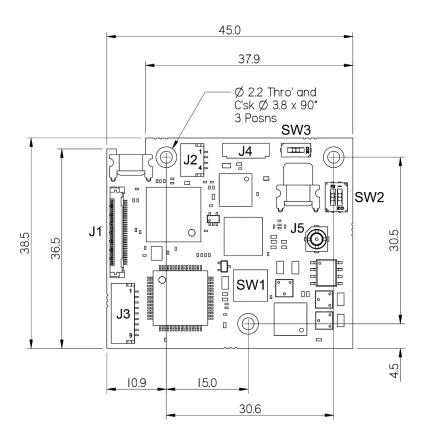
Harrier 3G-SDI Camera Interface Board (AS-CIB-3GSDI-002-A) mechanical overview (all dimensions in mm).
